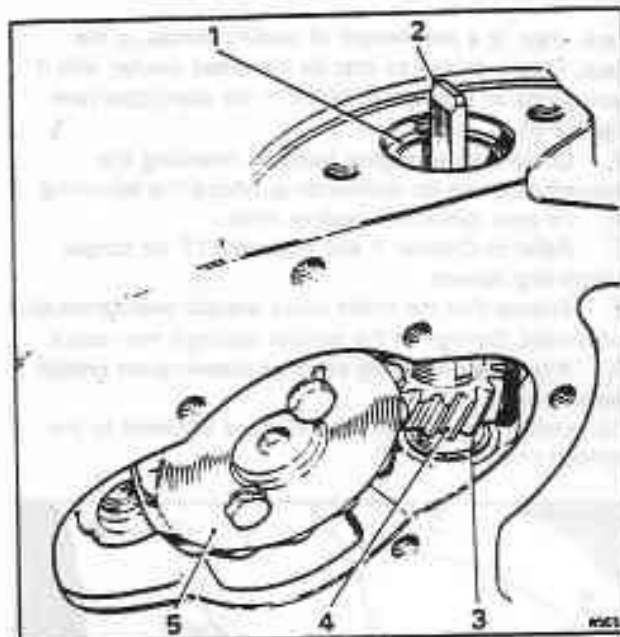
Distributor driving gears (other than turbocharged engines, and all engines conforming to 1983 model year specifications and onwards)
